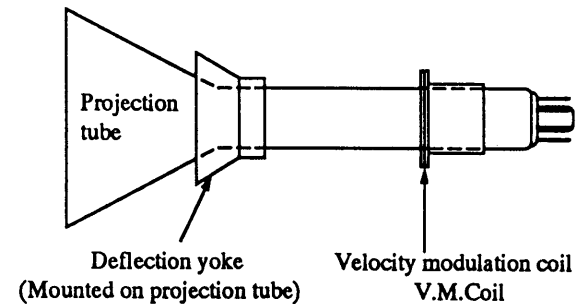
Mounting position of deflection yoke and V.M. coil
